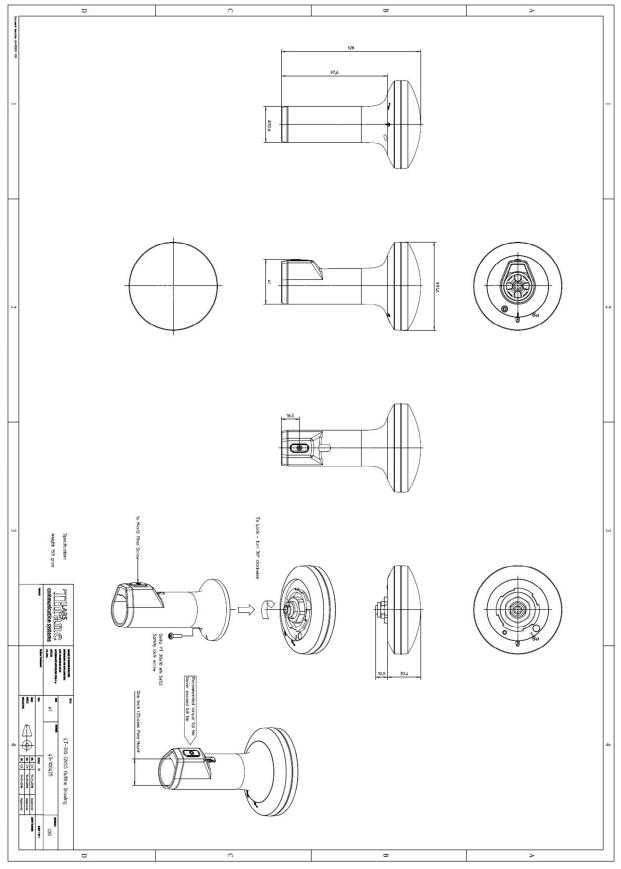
LT-300 GNSS RECEIVER OUTLINE DRAWING (POLE MOUNT)
